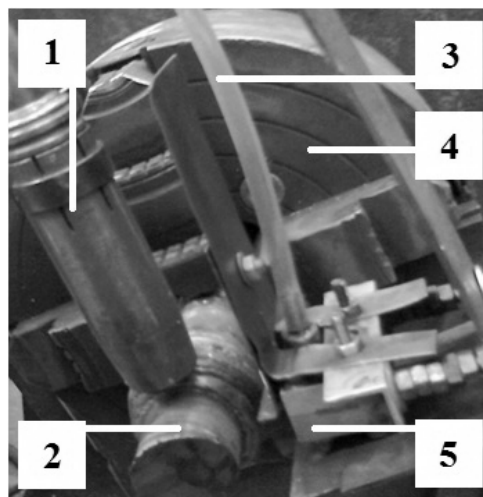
Stand for orbital surface welding with micro-jet cooling; 1 - welding head, 2 - shaft, 3 - cooling medium hose, 4 - turning handle, 5 - micro-jet nozzle
